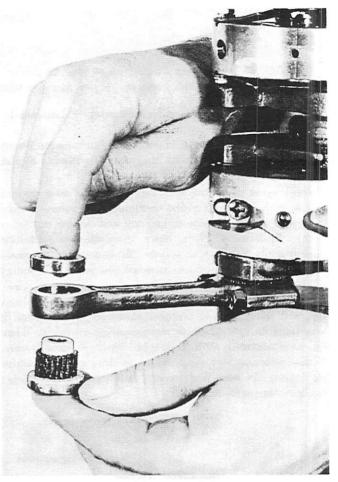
Inserting Piston Pin Bearings and Sleeve into Connecting Rod
